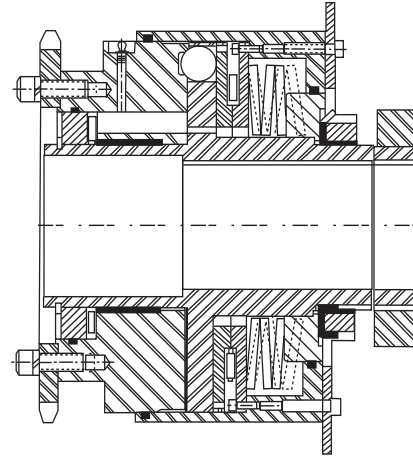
Type B - Style F, Standard Sprocket Mounting
